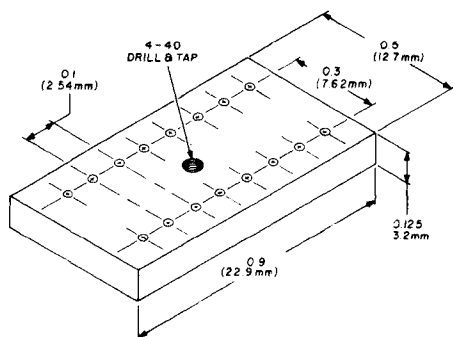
Dimensions of template block for drilling DIP holes in printed-circuit boards.
